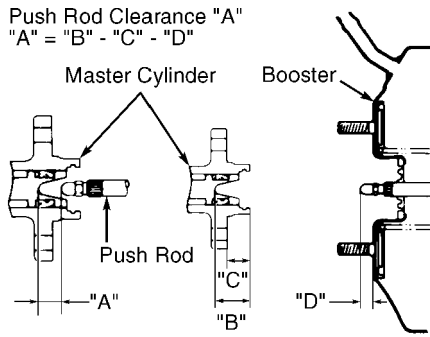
Adjusting Clutch Booster Push Rod Clearance (3000GT AWD)
